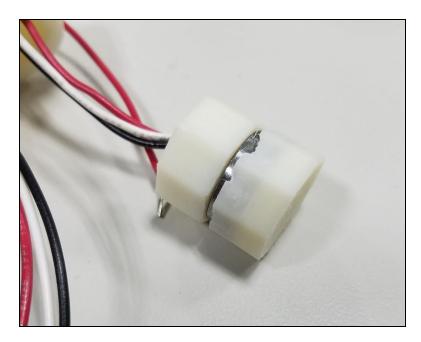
Universal Joint Assembly for Duke Designed RoboPuppet
